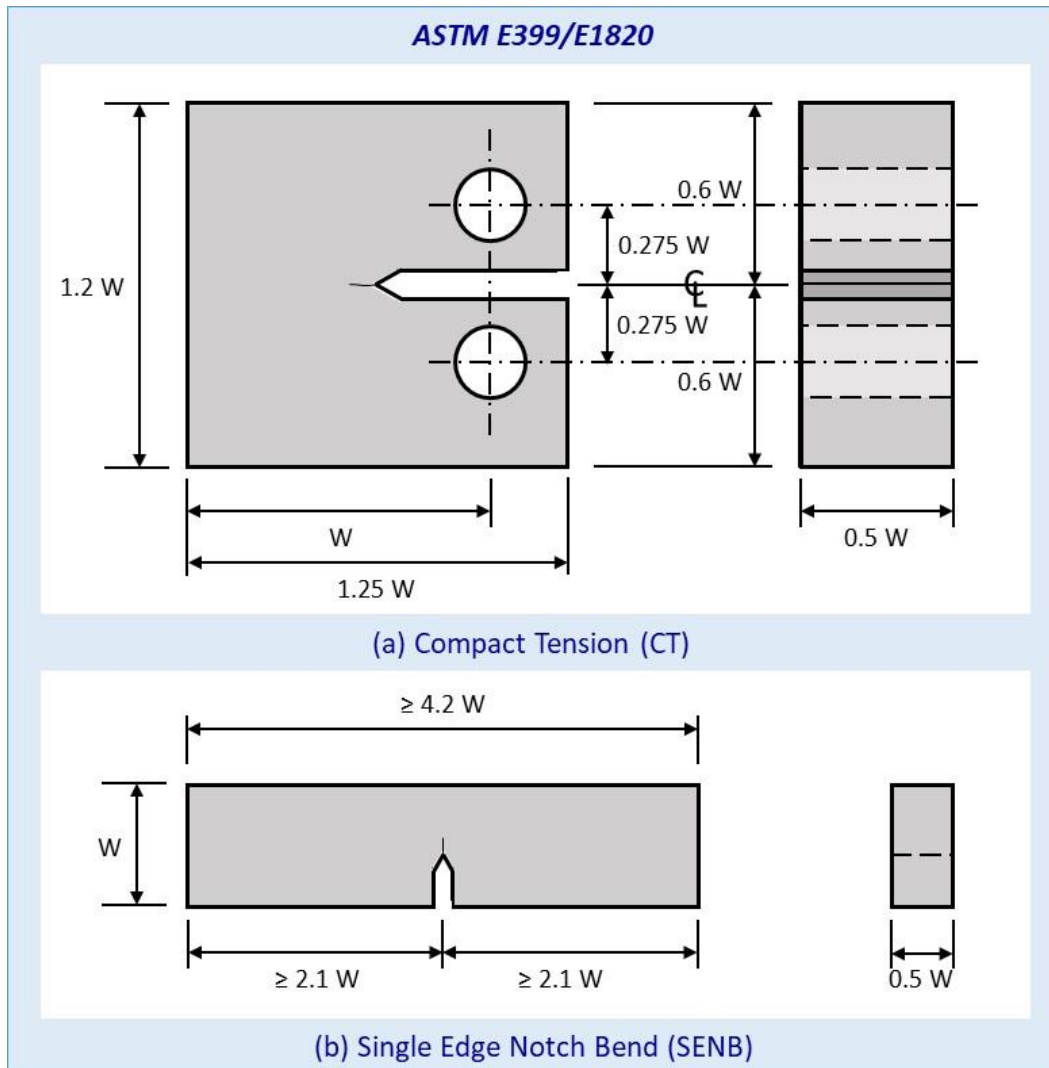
Most common specimen configurations for E399/E1820 fracture toughness tests [ref. 26]: (a), compact tension (CT) testing; (b), single edge notch bend (SENB) testing.
